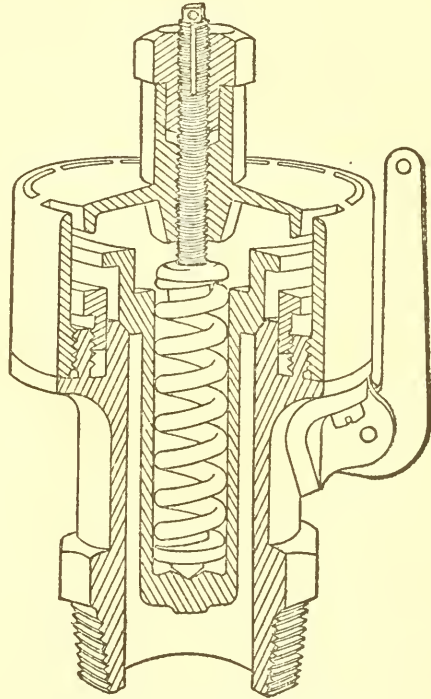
SECTIONAL VIEW OF POP VALVE.
